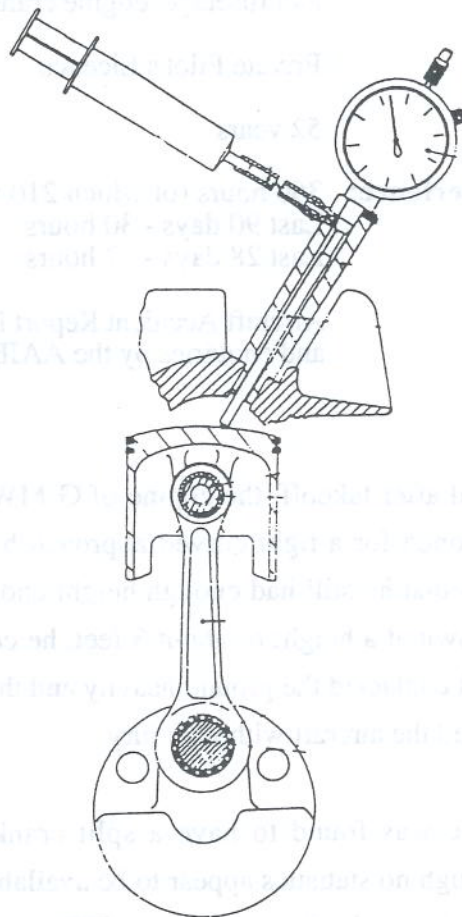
The Cyclone Conrod Bearing Clearance Tester for Rotax engines
